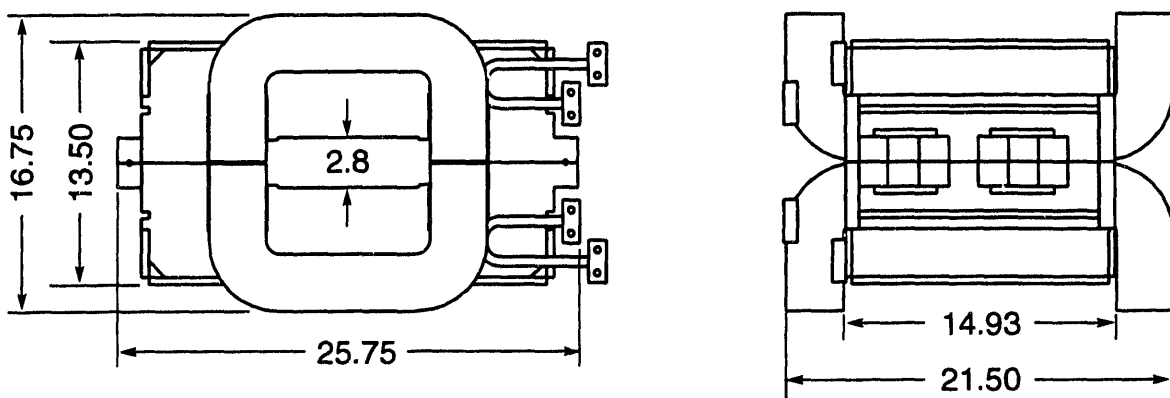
End and side views of the LER bending magnet. Dimensions are given in inches.
